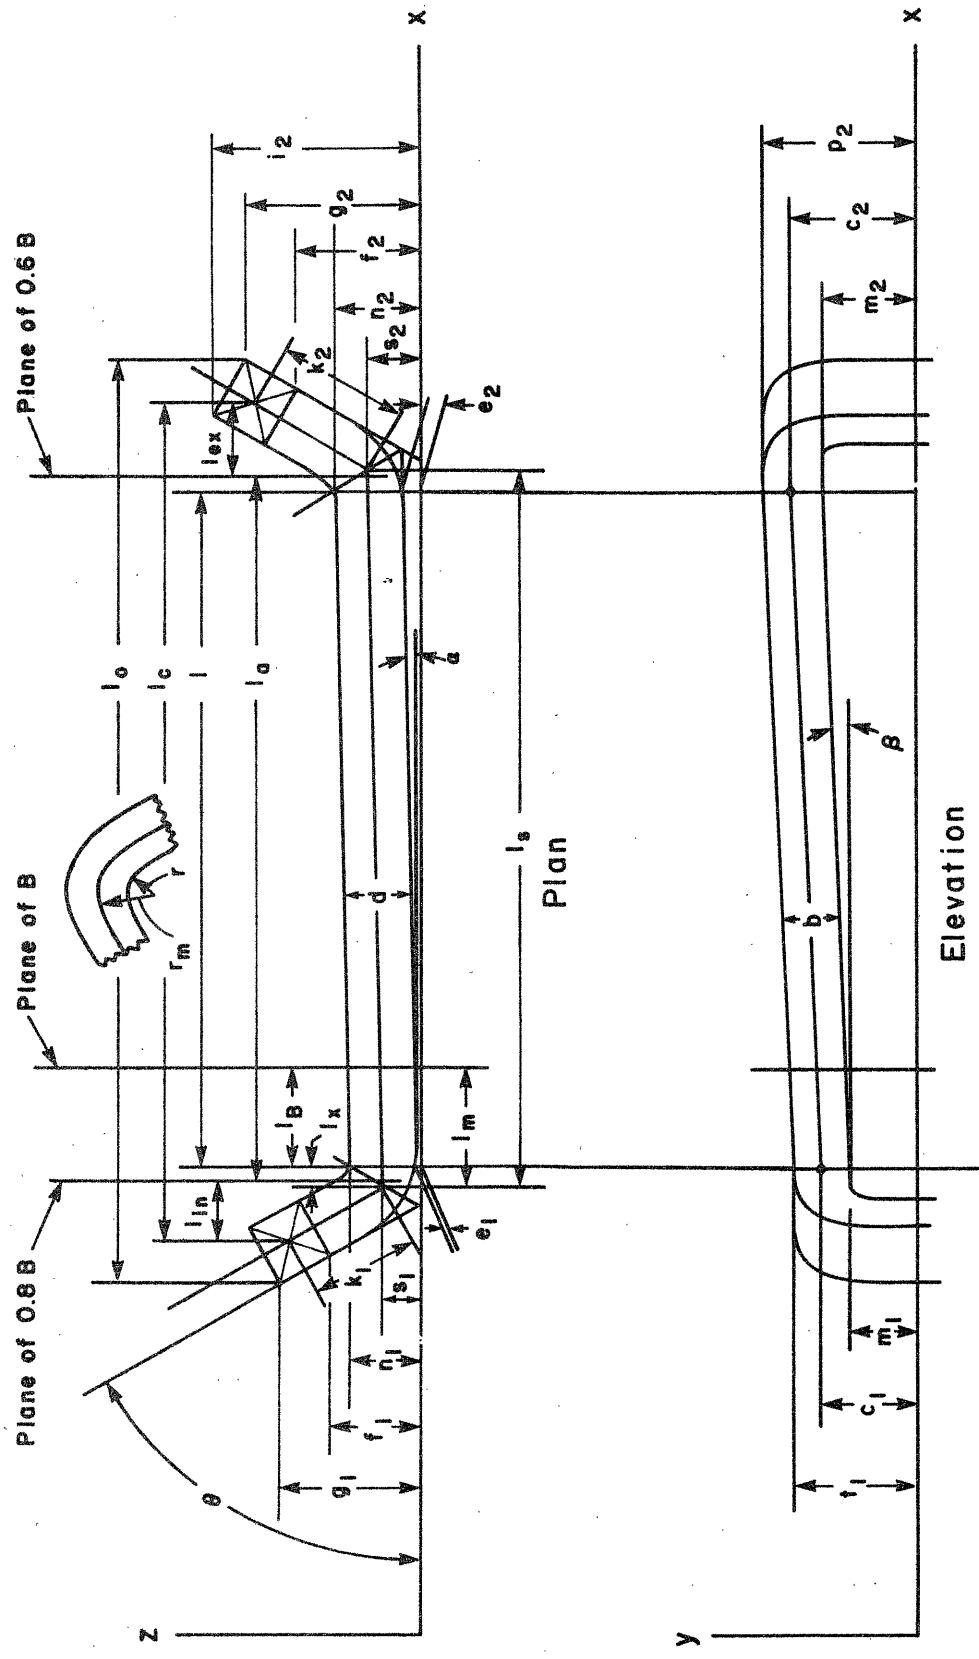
Elevation and plan views, typical MHD magnet winding
